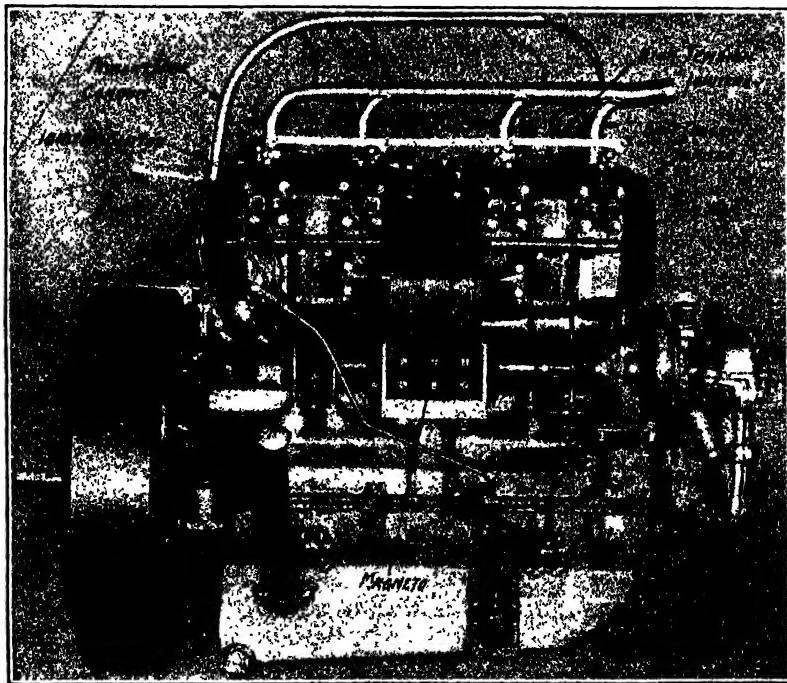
Side View of Engine Used on Early Columbia Automobile Having Both High and Low Tension Ignition System.
